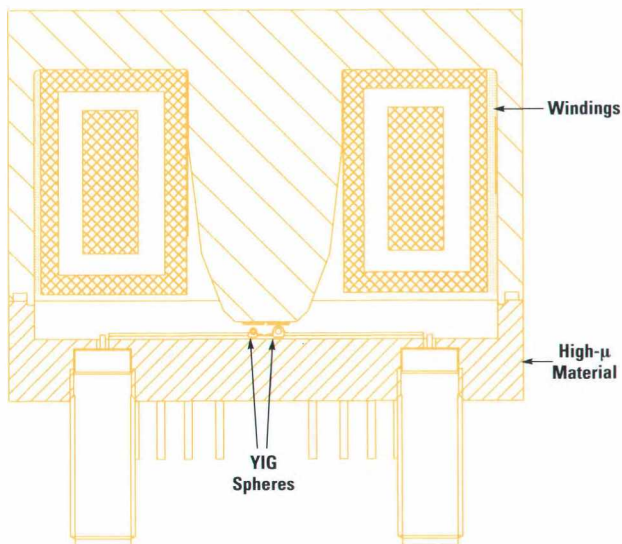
Cutaway drawing of the DY0 and SAFD magnet.
